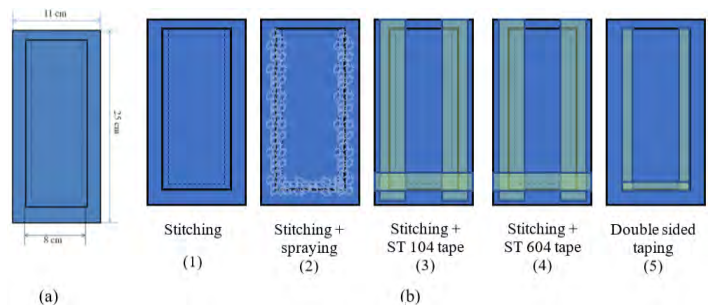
a) Dimensions of the pocket prototypes and b) pocket prototypes with different seam constructions
